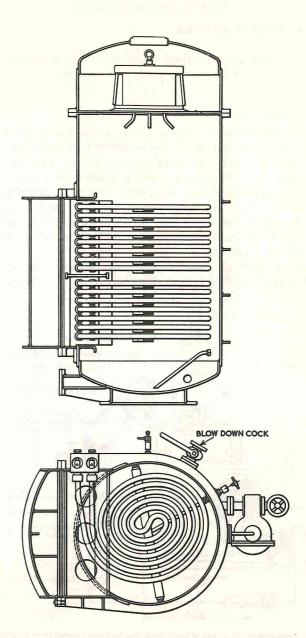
(b) Vertical and longitudinal sections of typical vertical low pressure steam heated steam generator
